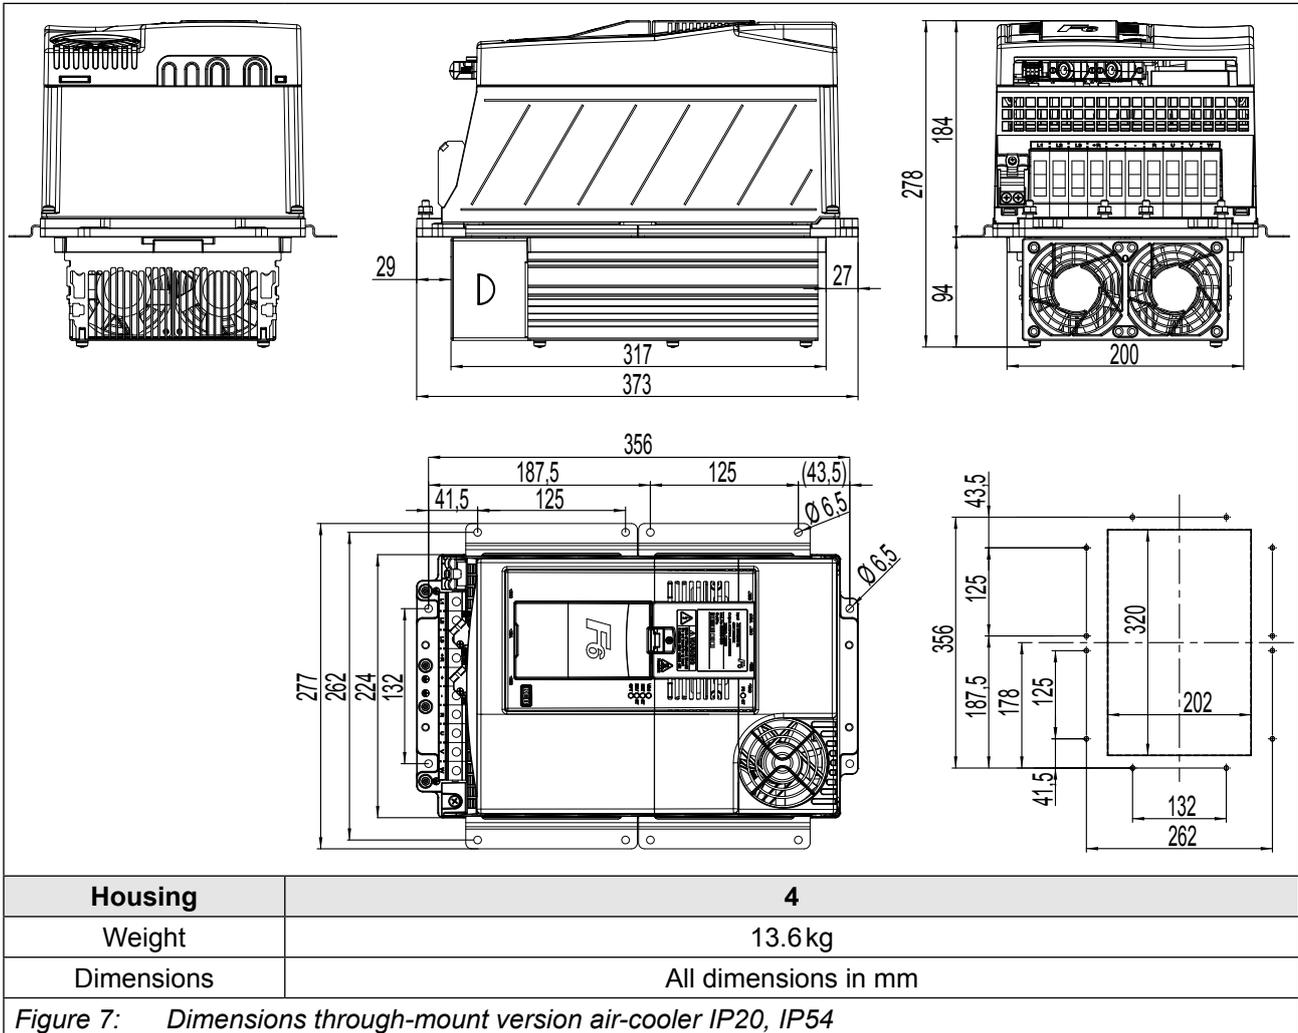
Dimensions through-mount version air-cooler IP20, IP54
